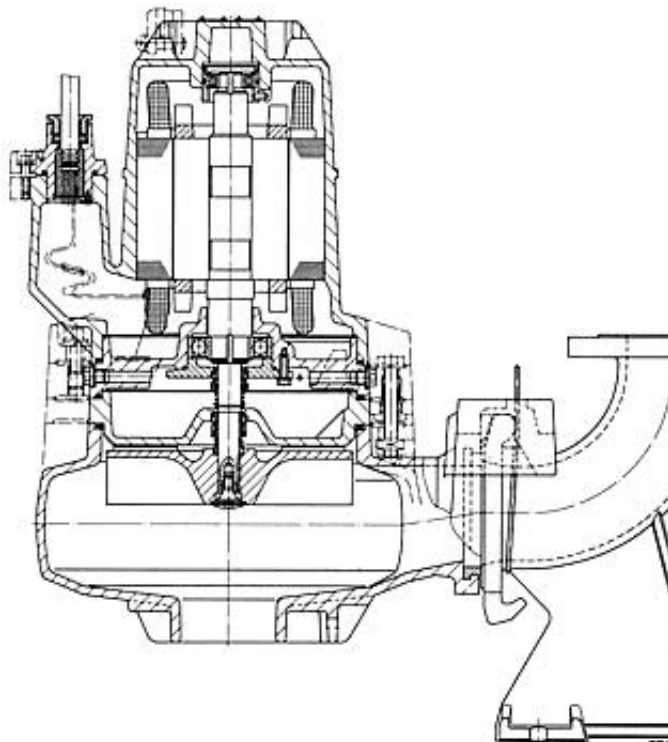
Submersible motor pump with torque-flow impeller used as a sewage pump
